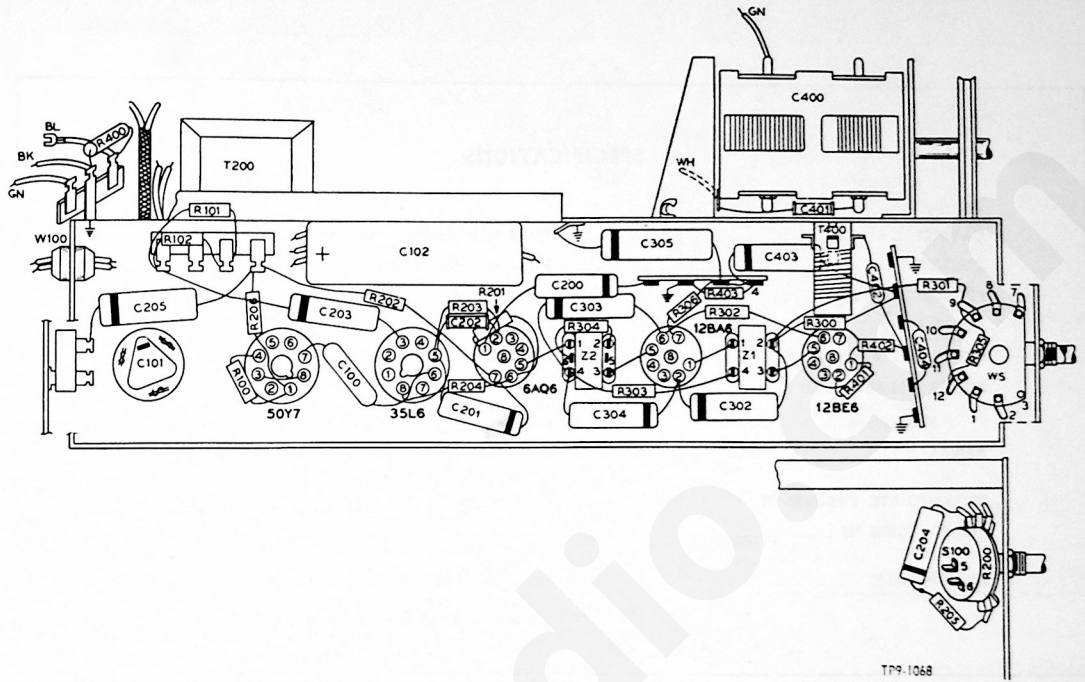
Bottom View of Model 50-1423 Chassis, Showing Parts Placement
